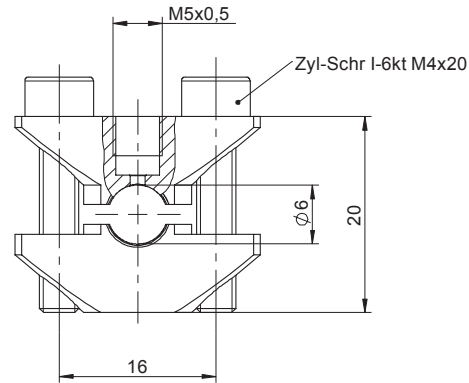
Clamping adapter Type 6533 for various pipe-diameters
